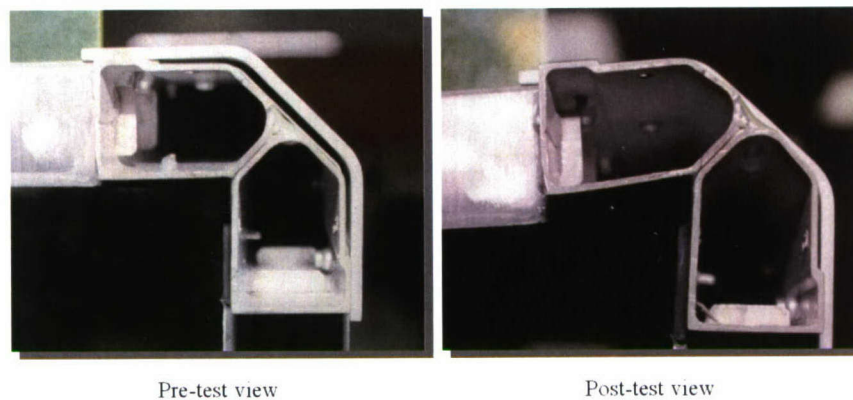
Pre-Test and Post-Test Views of Roof-to-Side-Wall Joint in Representative Structural Testing
